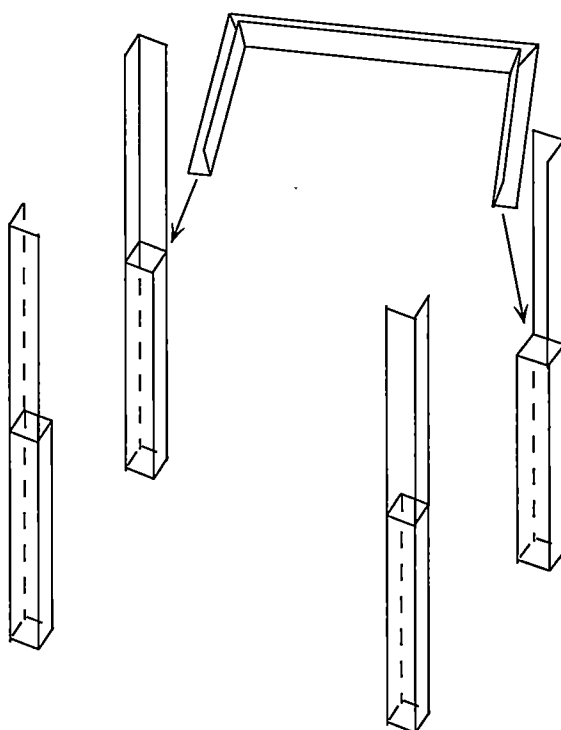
Aluminium frame components, showing frame legs and one horizontal section. The frame locks together as the horizontal sections are placed into the lower half of the legs.
